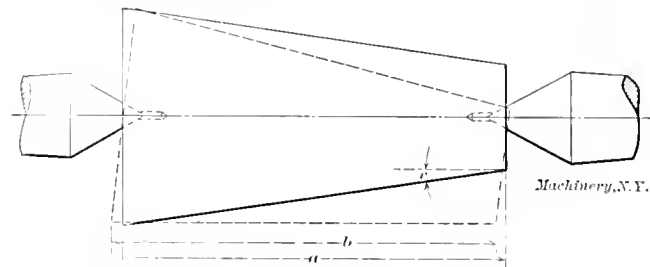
Showing Effect of setting over Tail-stock when threading Taper Taps.
